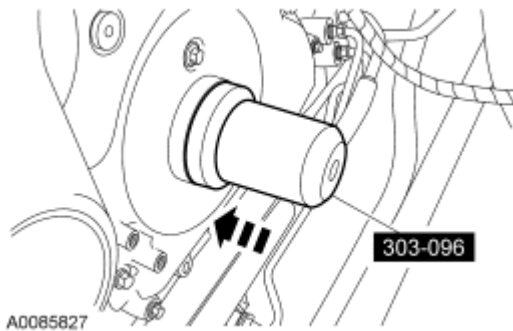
Installing Crankshaft Front Oil Seal Using Special Tool
